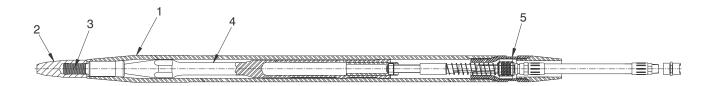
Model 310-TH Hole-Hog Complete Assembly Serial Number 1100 and Above
